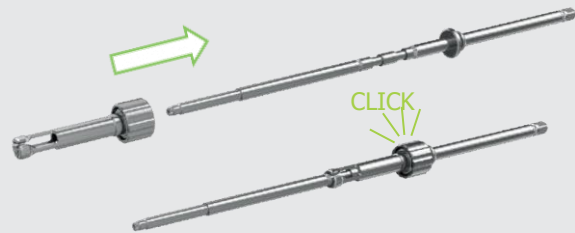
Assembling Navigated screwdriver shaft with Basic Core of e.g. VI-1130.
